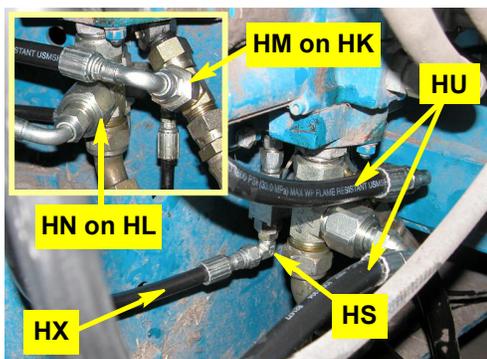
i: Pressure, tank and load sense hoses connected at valve stack
